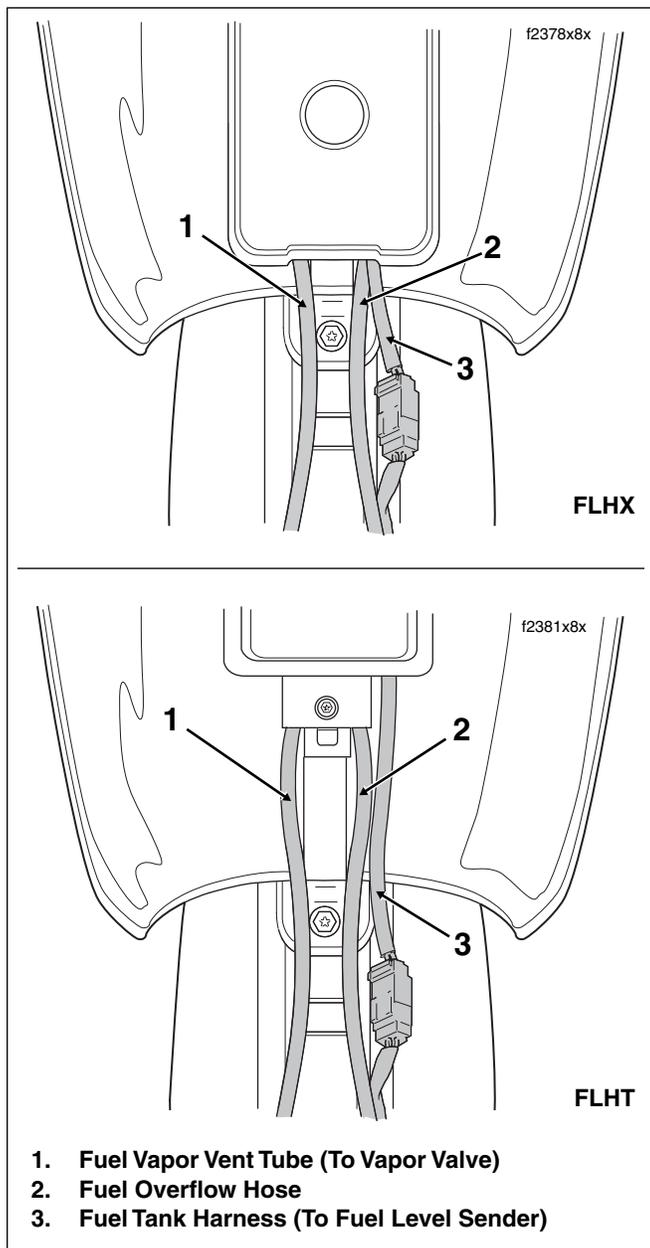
Console Cable/Hose Routing (FLHX, FLHT)
